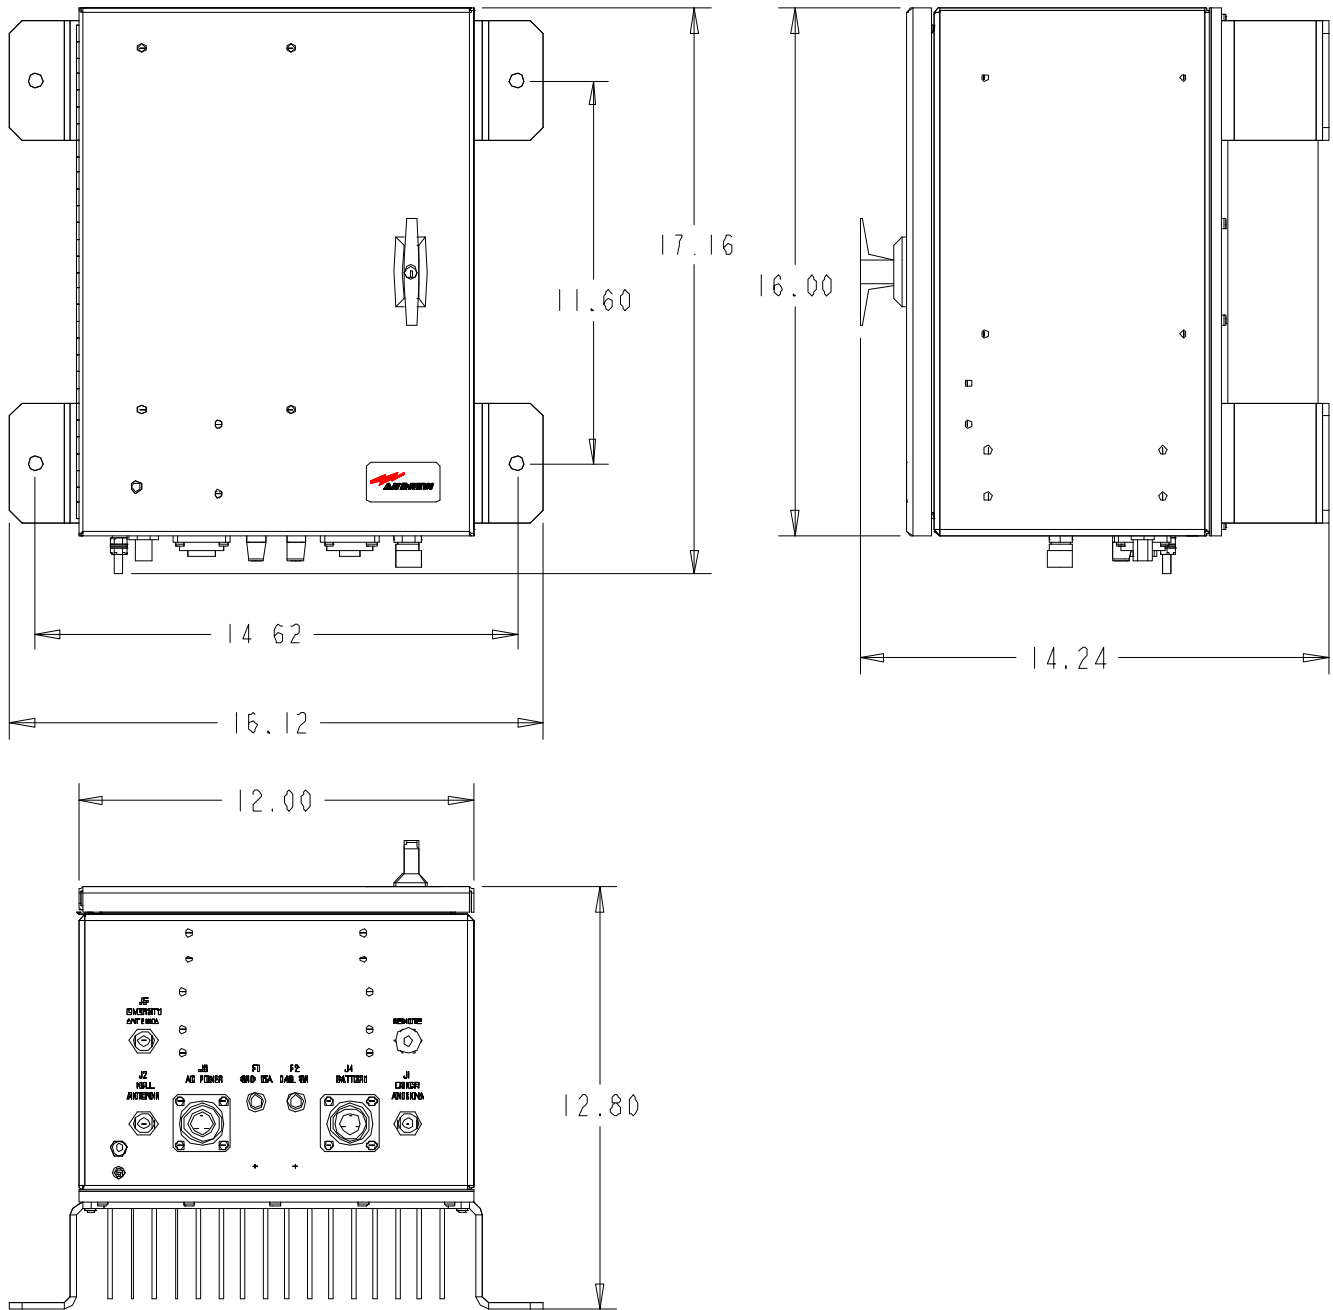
SelectAmpCDMA 800 Series Outline Drawing
